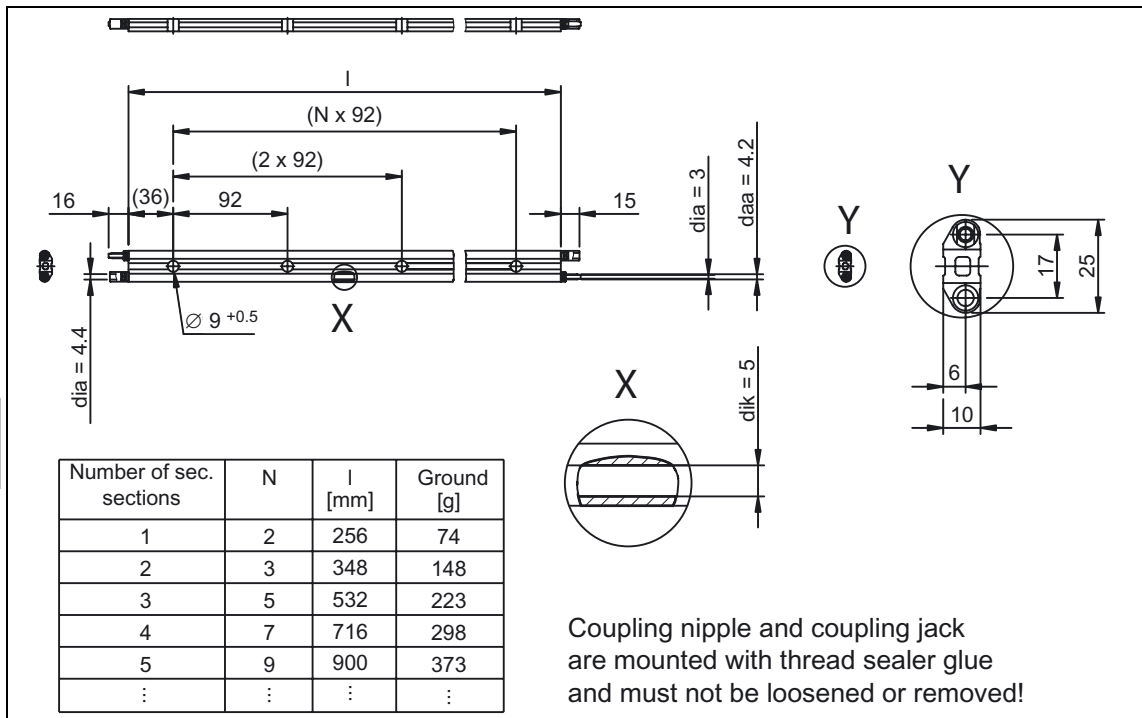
Cooling section with plug nipples for the 1FN3600 motor models
